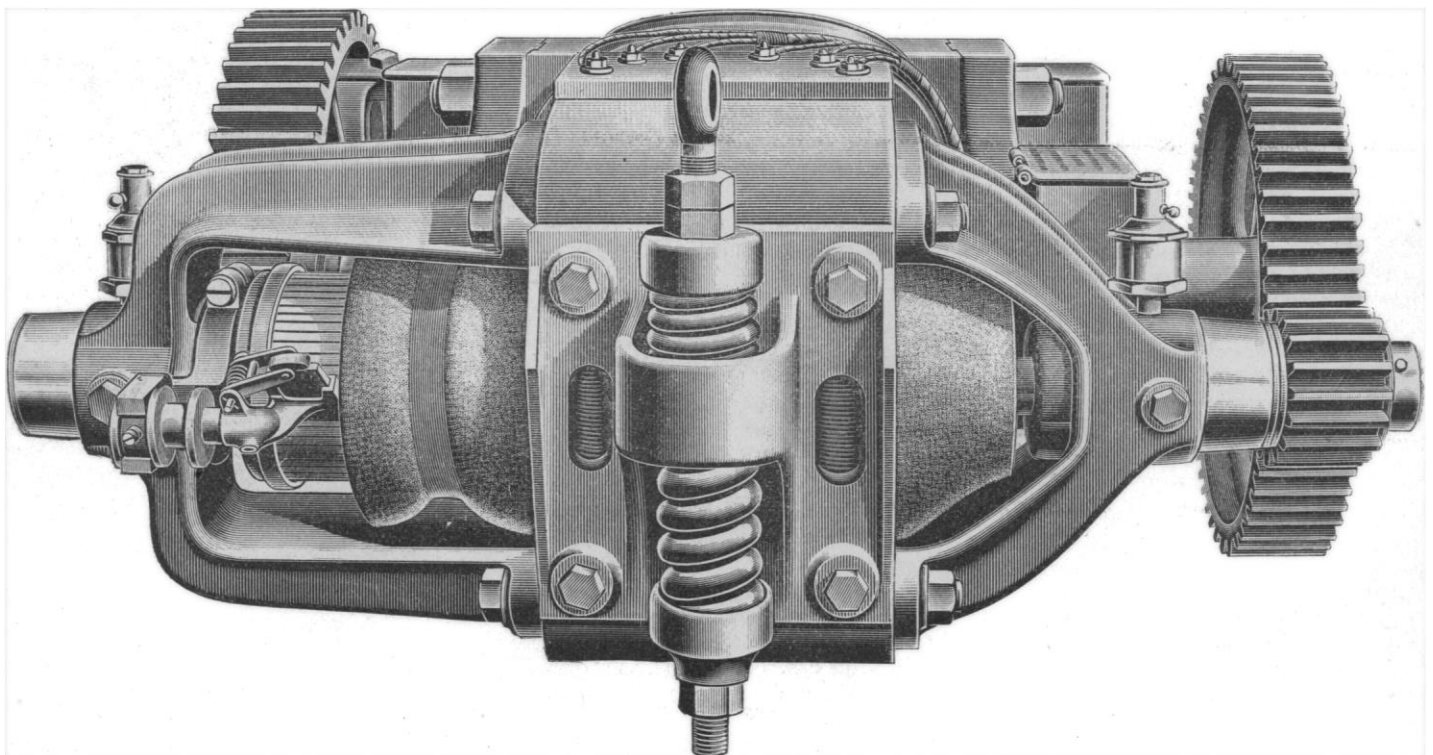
NEW SPRAGUE ELECTRIC-RAILWAY MOTOR.
